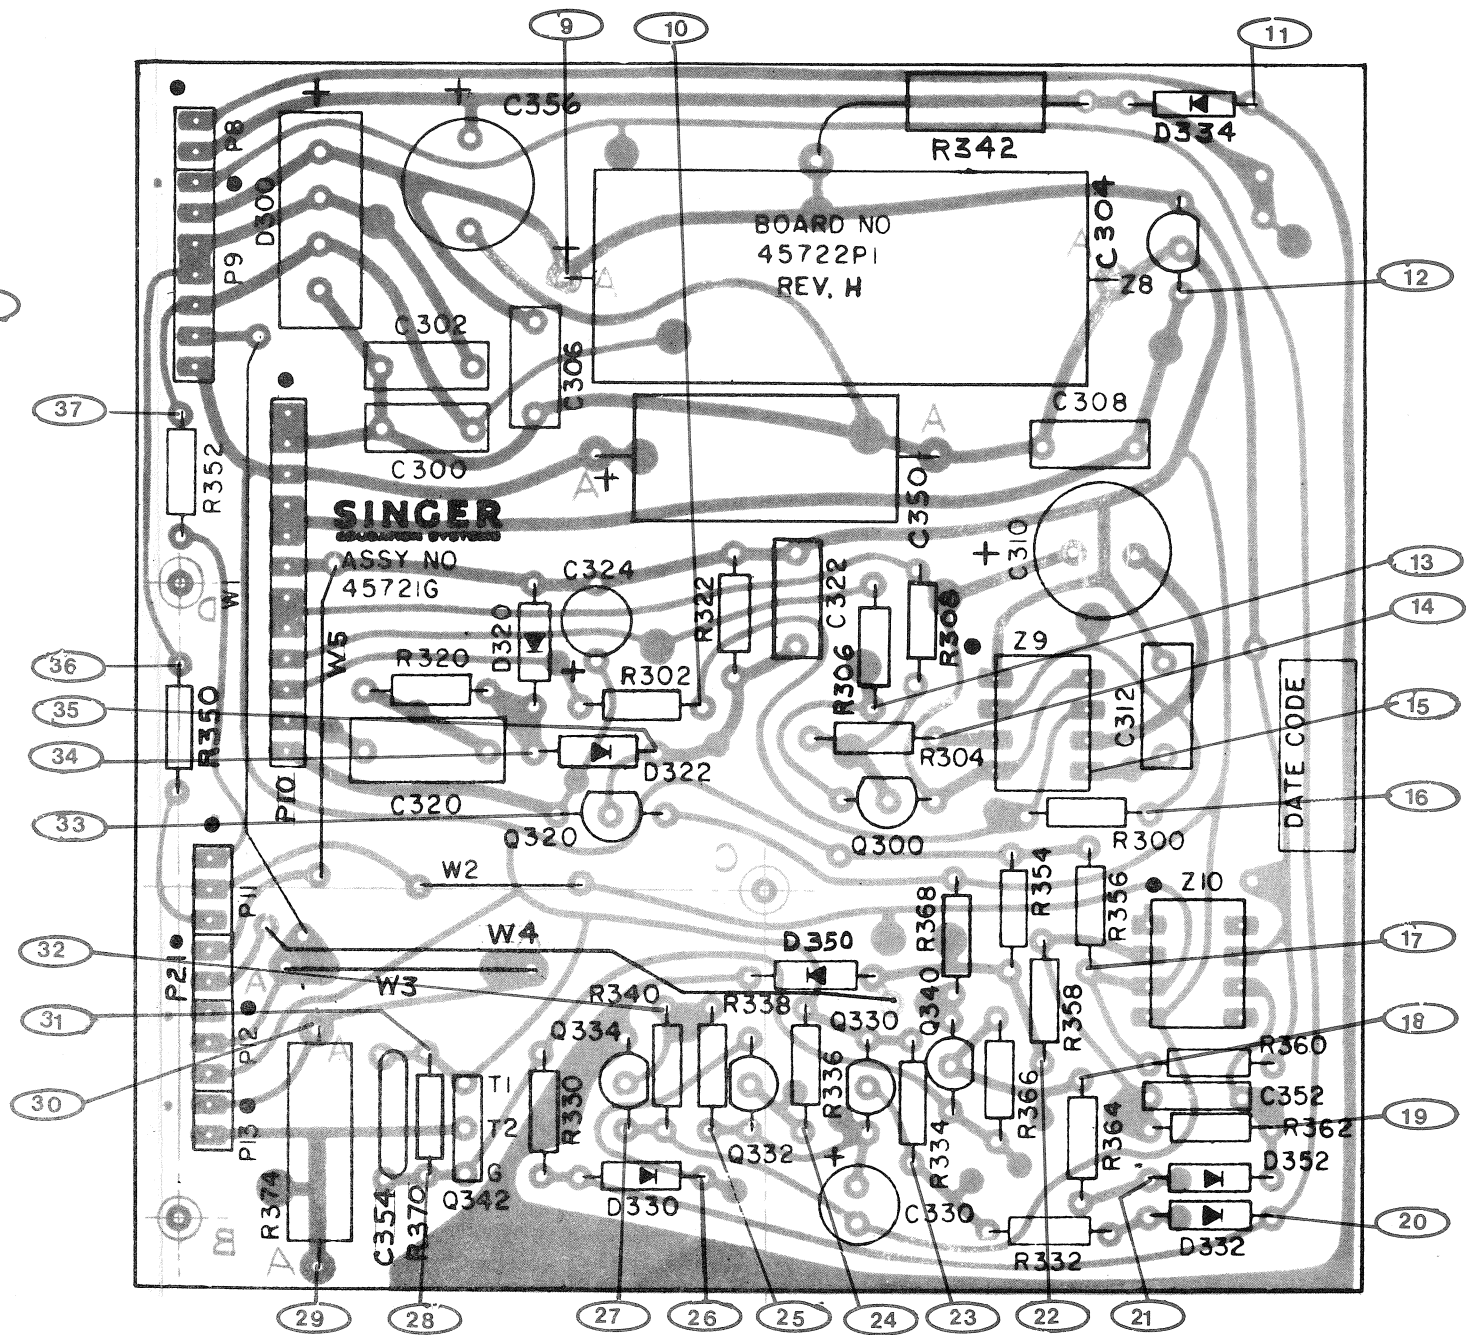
POWER SUPPLY AND AF-T BOARD ASSEMBLY (Model 3230)
